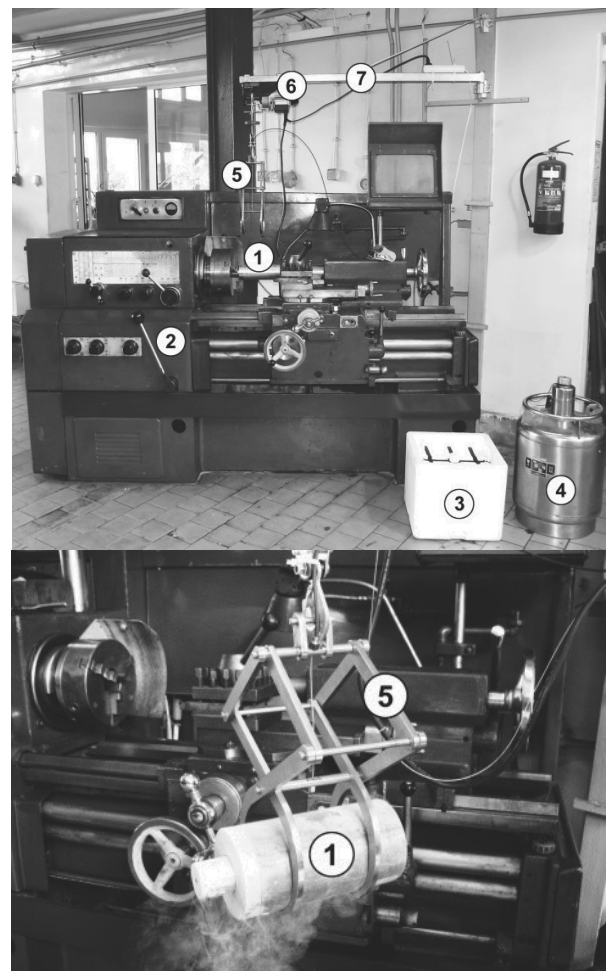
Setup for cryogenic machining: 1-frozen workpiece, 2-lathe, 3-cooling chamber, 4- liquid nitrogen resevuar, 5- gripping device , 6-rope elevator, 7-rotating arm
